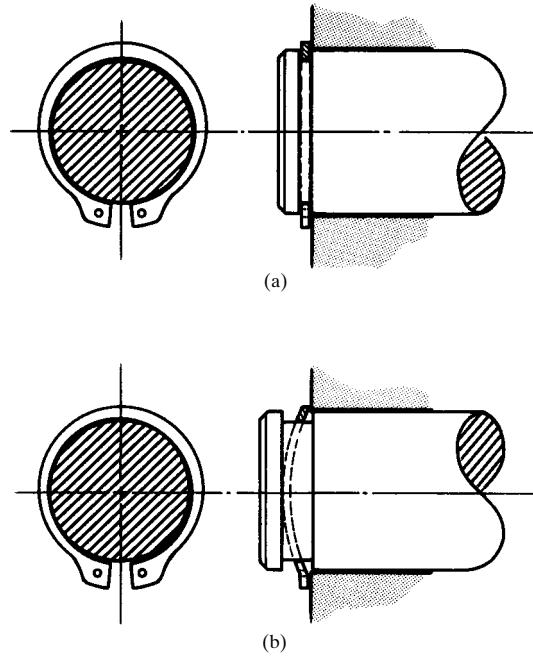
Internal rings. (a) Flat type (see Fig. 24.13e for shape before assembly); (b) bowed type (see Fig. 24.13f for shape before assembly).
